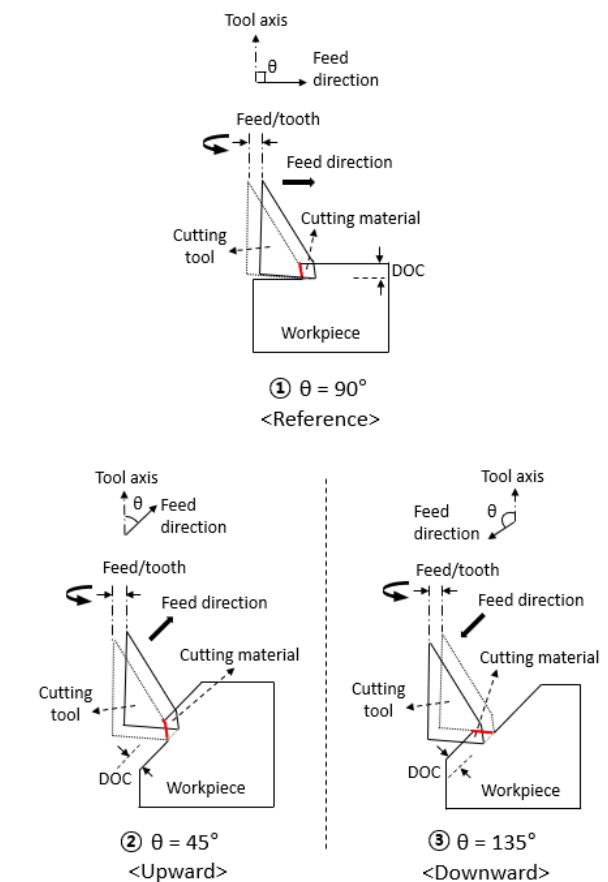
Schematic of cutting between tool and workpiece according to tool orientation
